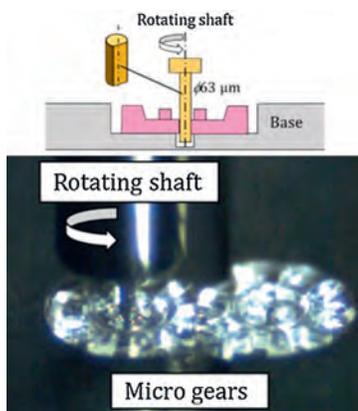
Rotation of driving gear using rotation axis of EDM machine.
